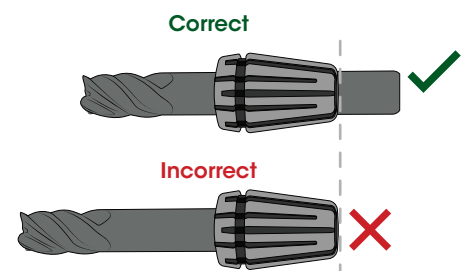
A comparison showing the correct and incorrect way to insert the cutting tool into the collet. Ensure that the cutting tool goes completely through the collet and that the stick-out extension length of the cutting tool from your collet is no more than 3 times the diameter of your cutting tool.
